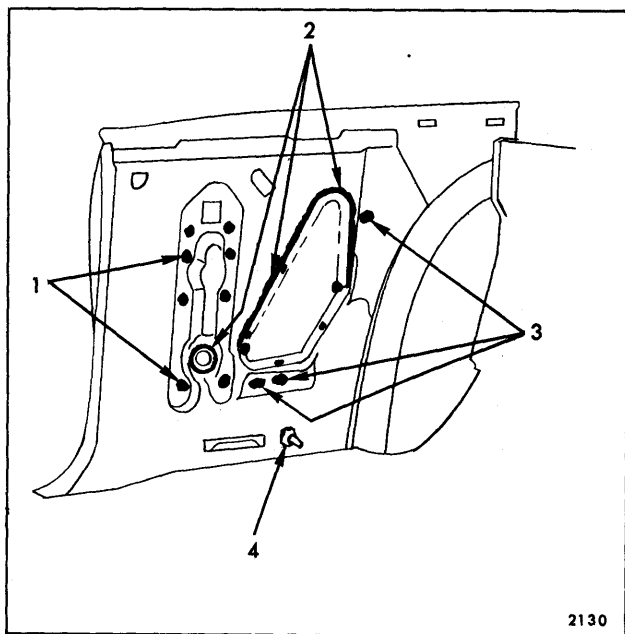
Rear Quarter Inner Panel Sealing - "67" Styles
